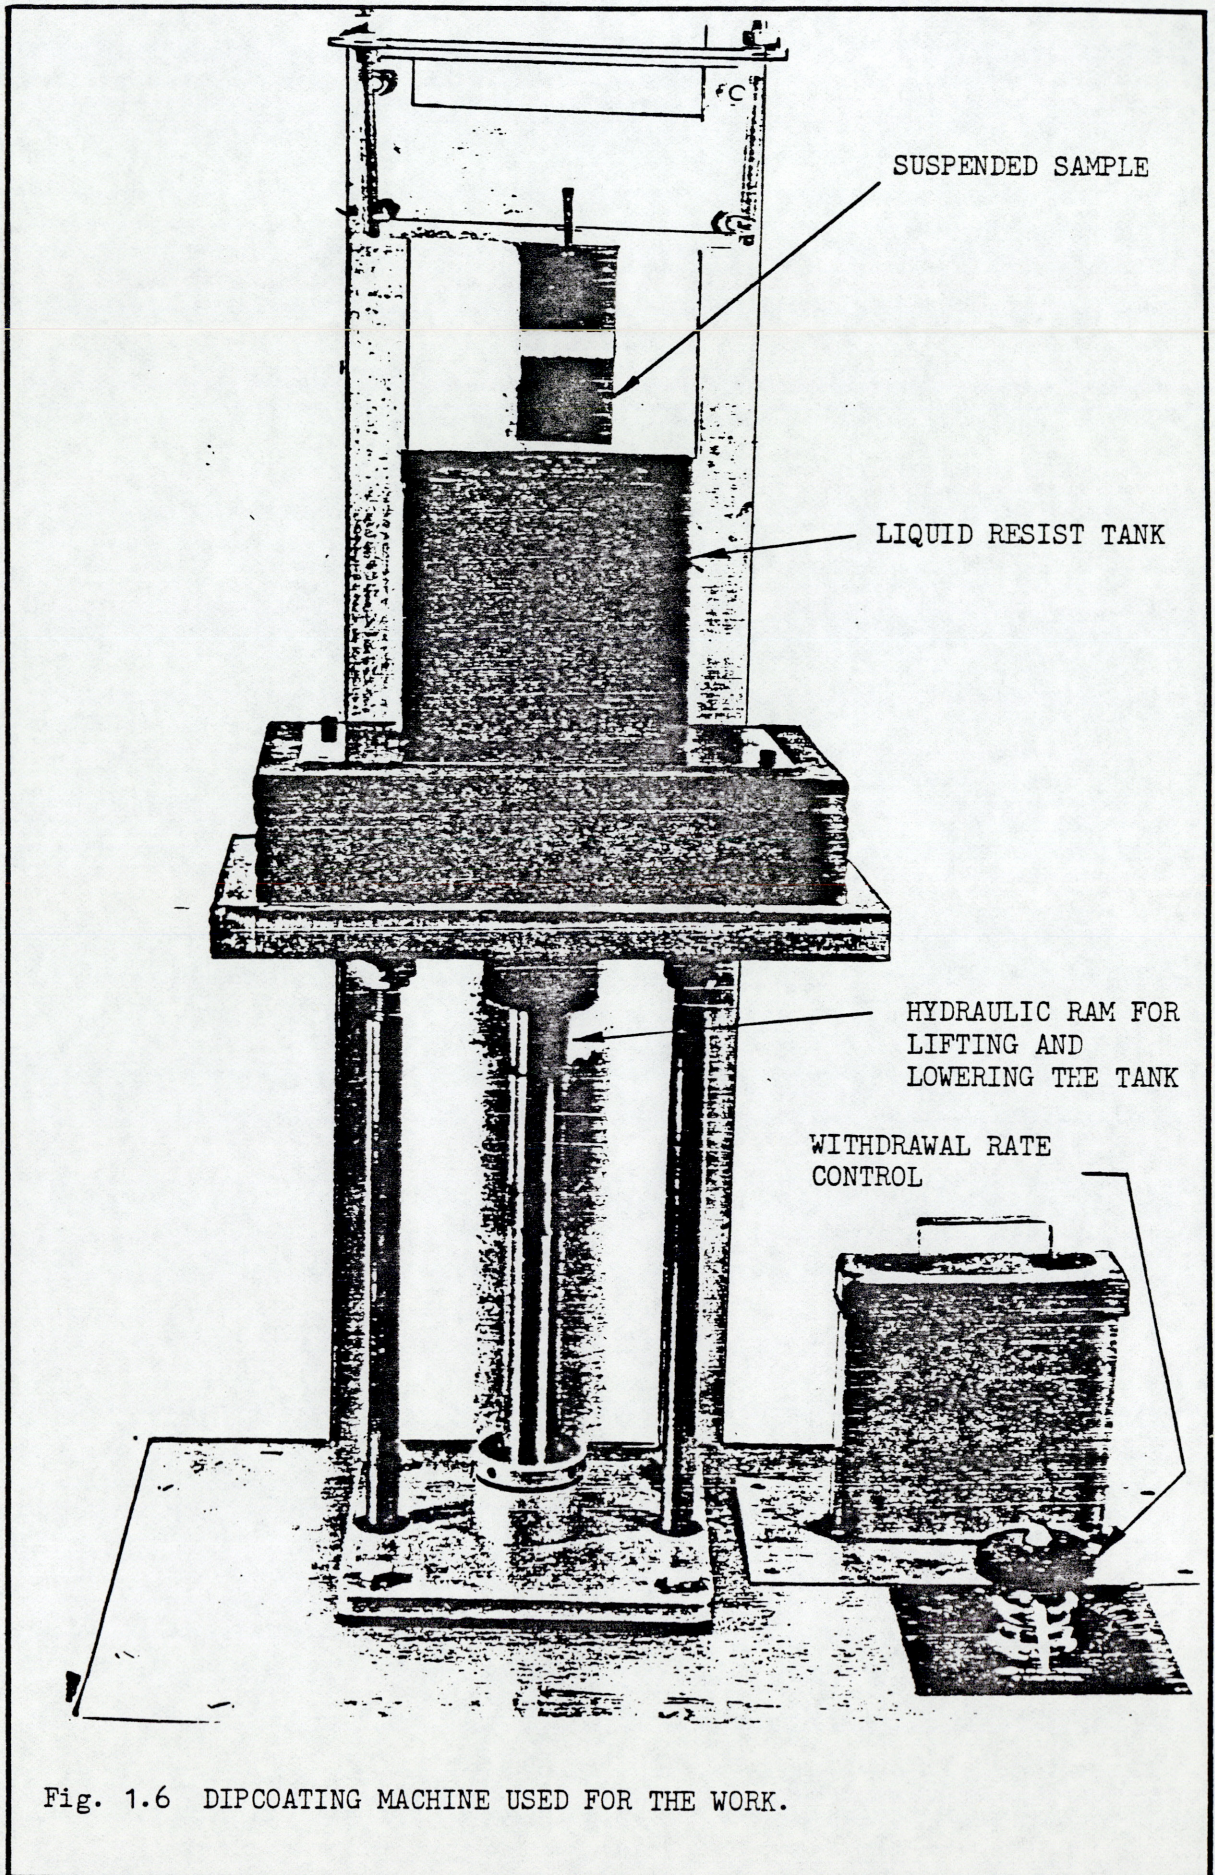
DIPCOATING MACHINE USED FOR THE WORK.
